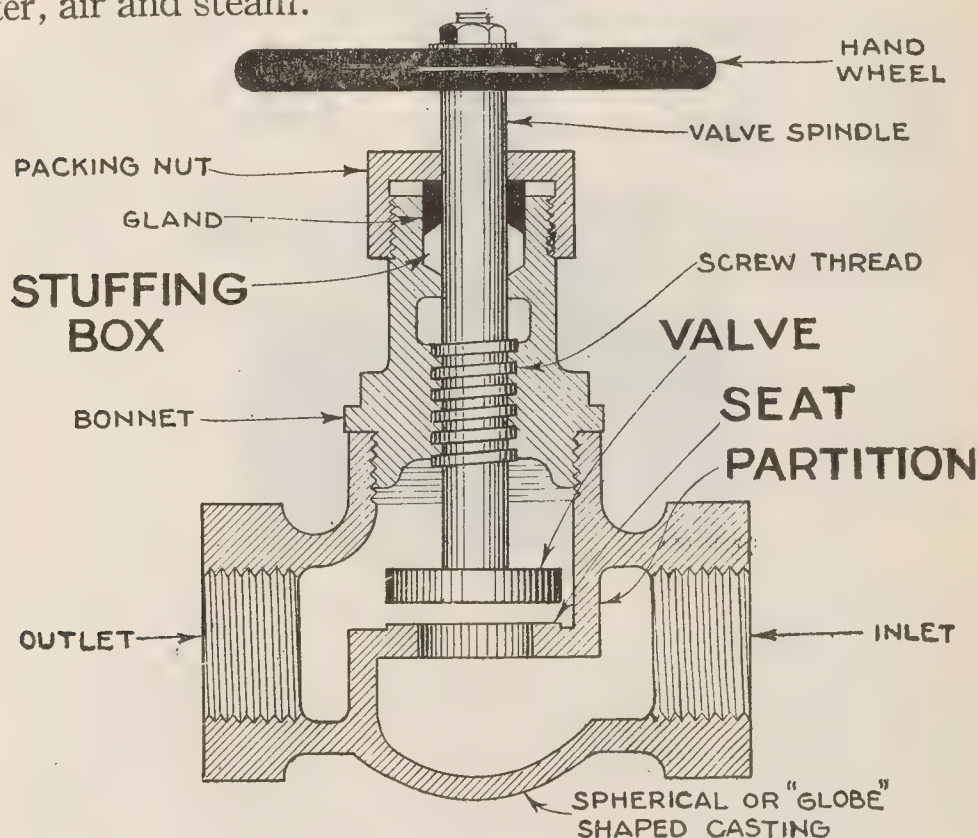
,114.—Globe valve. A commonly used type of valve which takes its name from the globe shaped casting forming the body of the valve. *It should be noted* that whereas the entire assemblage of parts here shown is ordinarily called a valve, the term valve, strictly speaking and in accordance with the definition, means the disc at the end of the valve spindle. This disc is the "lid or cover" mentioned in the definition.
